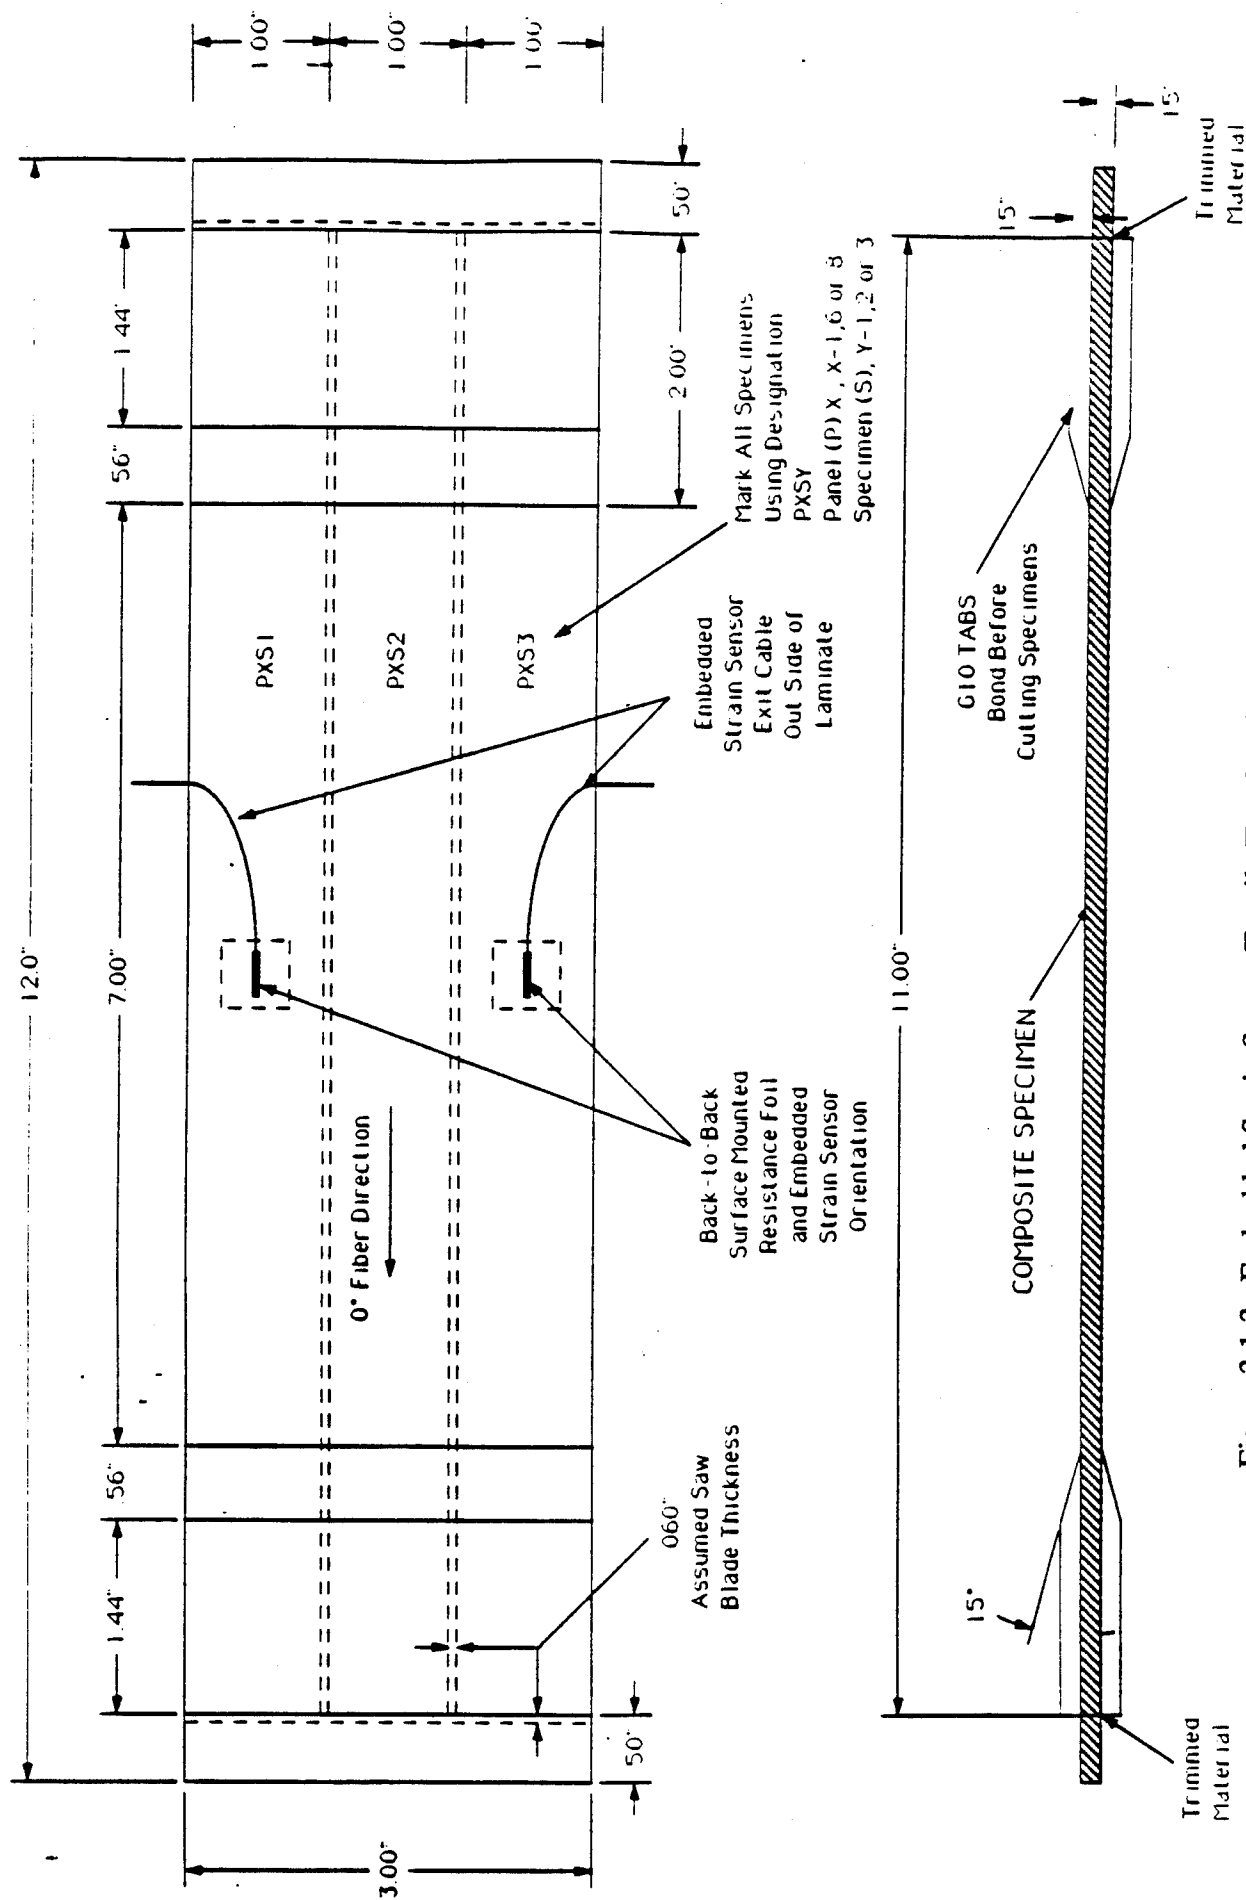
Embedded Strain Sensor Tensile Test Specimen Cutting Map.
